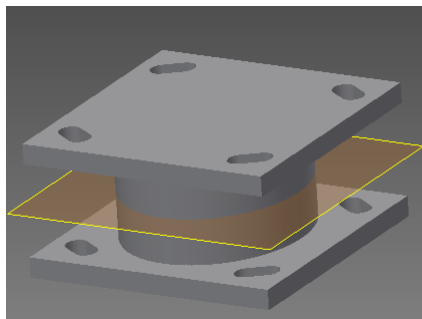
The caster draft. CAD draft of the caster for spin mechanism in the mechanical system
